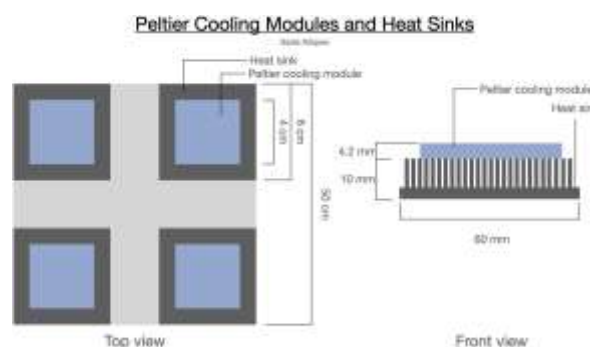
(Above). Front and side views of Peltier cooling modules paired with heat sinks. Dimensions used match the ETX2.5-12-F1-4040-TA-RT-W6 Peltier cooling module from Laird Systems and the HSB22-606010 heat sink from CUI devices.
